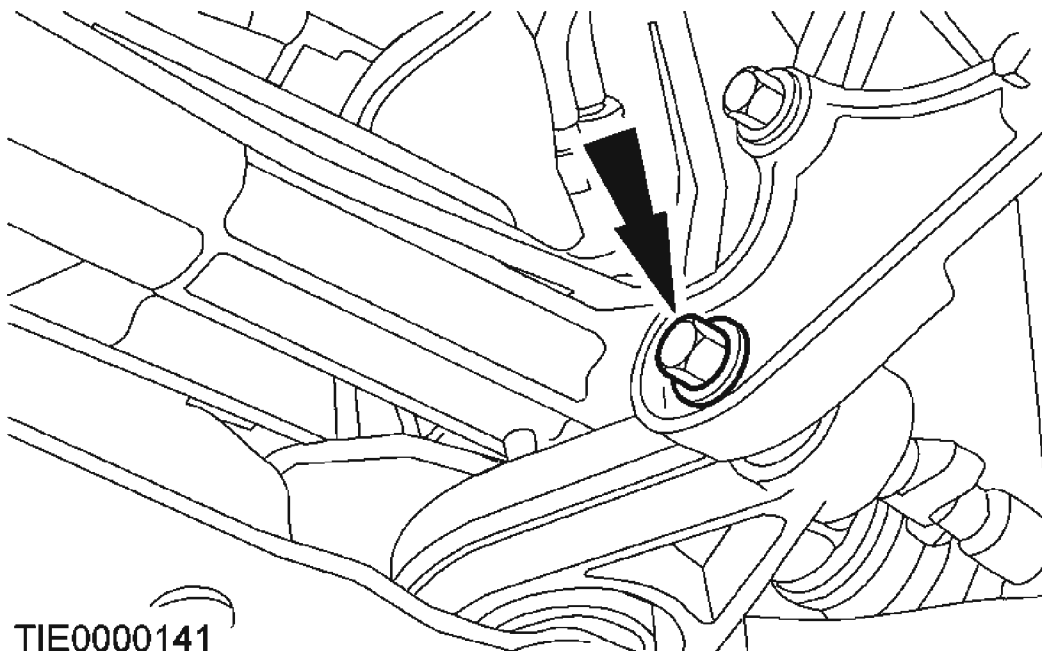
Removing Engine Support Insulator-To-Transaxle Center Bolt
